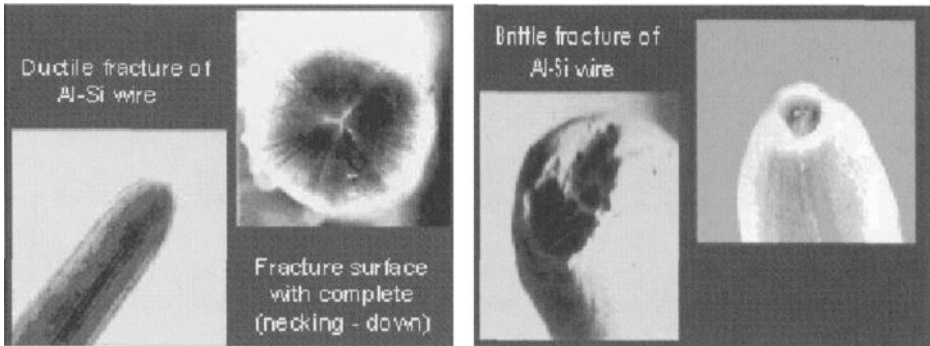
(a) Ductile fracture of Al-Si wire Figure 2.5.2 (b) Brittle fracture of Al-Si wire
